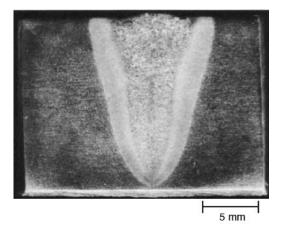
25Cr-1Mo steel plate, single-pass electron beam weld. Macrostructure shows high depth-to-width ratio of the fusion zone, which is typical of high-energy-density welding processes. Source: Ref 1.3
